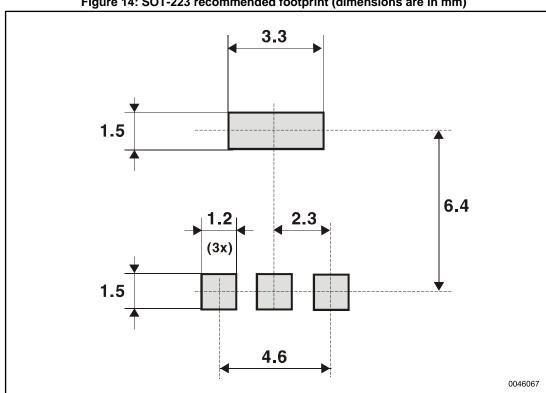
SOT-223 recommended footprint (dimensions are in mm)
